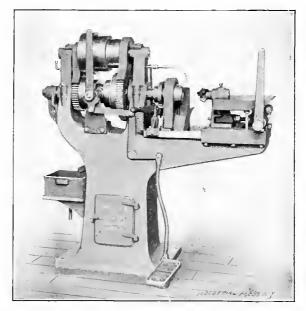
Nut Facing Machine. Detrick & Harvey Mch. Co.
